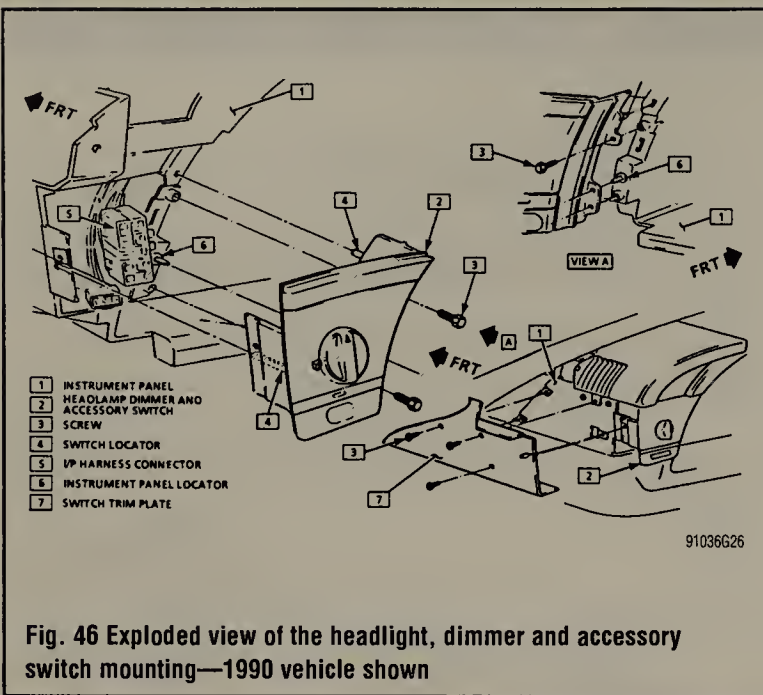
Exploded view of the headlight, dimmer and accessory switch mounting—1990 vehicle shown
